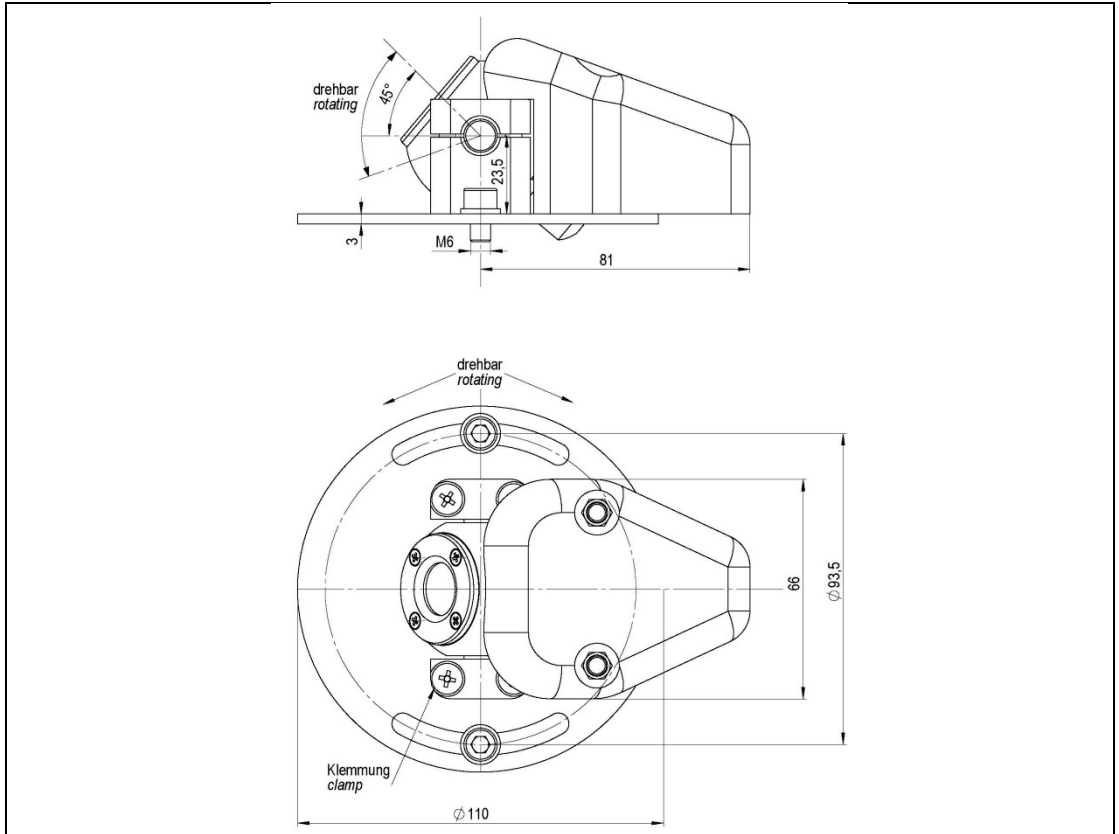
Dimensions ball head sensor, type NOS-V20BS
